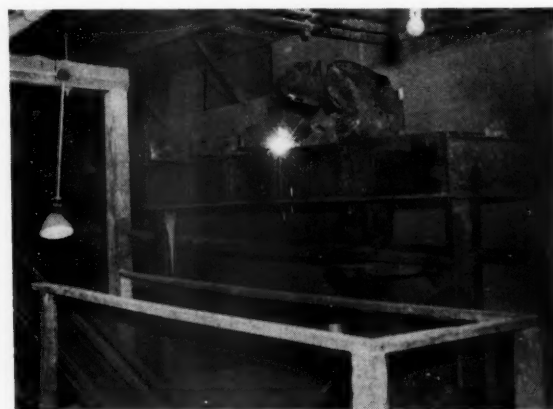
Welder works on fabricated foundation for gold recovery apparatus
